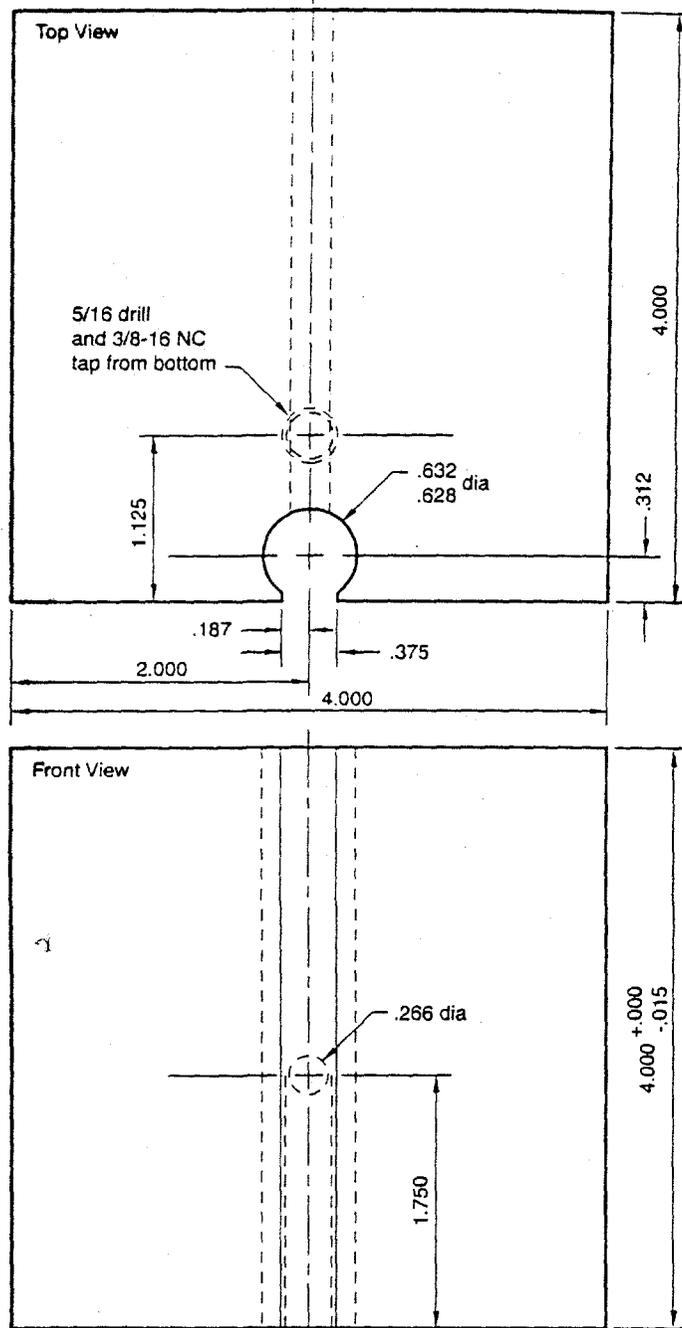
Detailed drawing of irradiation station source tube fixture through which the capsule travels upon arrival at or departing from the irradiation assembly. The source tube fixture slides into the moderating/reflector block with the vent adaptor sliding over the tube to surround the position of the vent hole in the source tube fixture. The vent hole is connected to the vent solenoid valve which is normally open and closed if a stuck capsule is to be freed by an air impulse from the irradiation end. The irradiation position is identified as the position along the source tube fixture where the wall thickness is thinnest.
